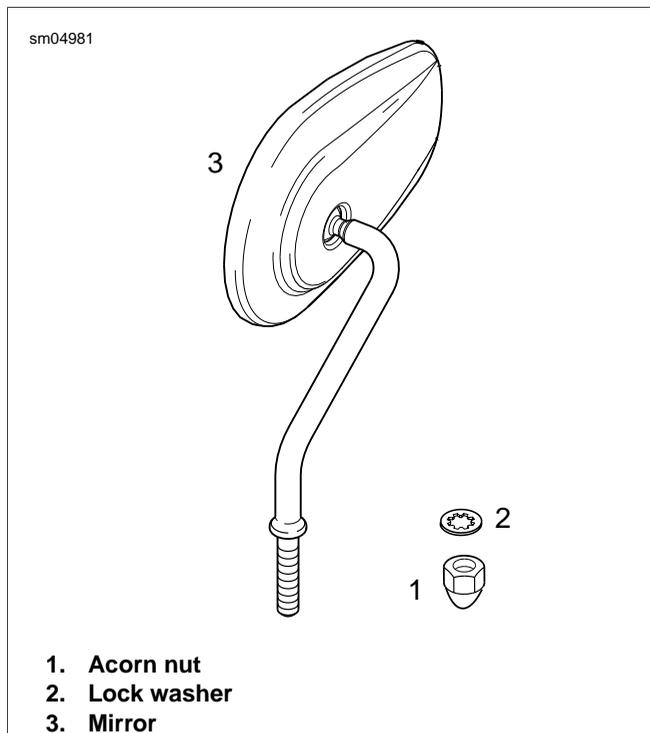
Mirror Assembly (All Models Except FLHX)
